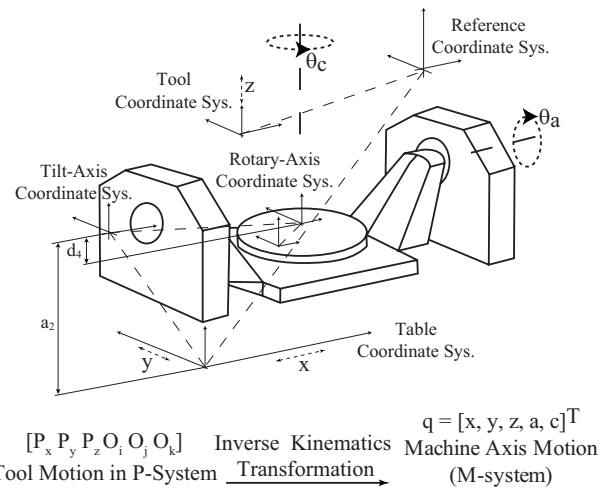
Tilting rotation table (TRT) five-axis machine tool
